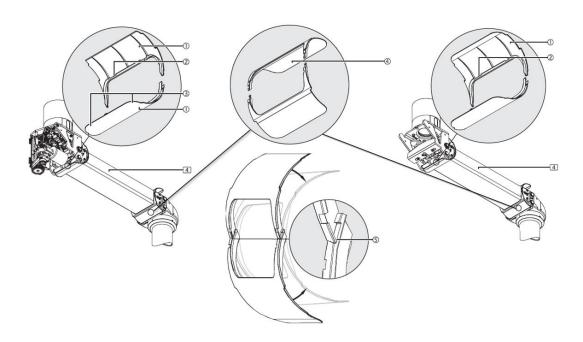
Mounting of rear and front protective covers on a spring or motor arm
